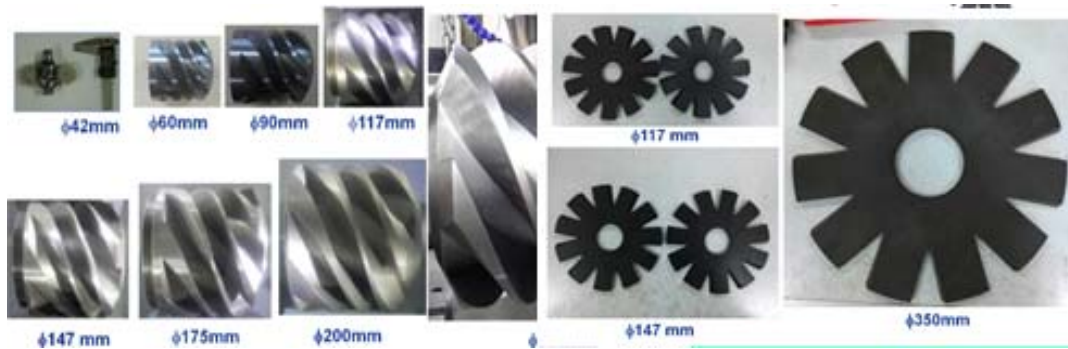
single screw rotor and gaterotor prototypes with different sizes
